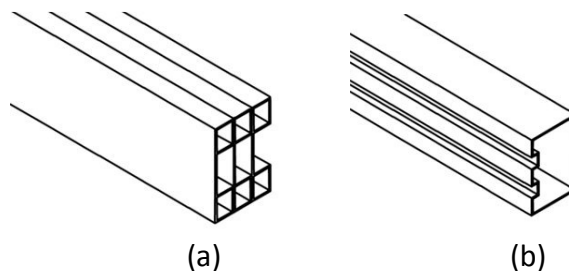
(a) Horizontal stacking a common B-section and (b) manufacturer reinforcements.
